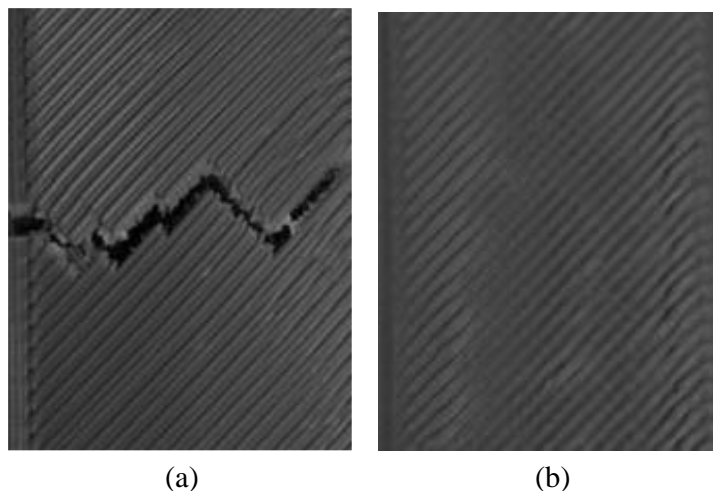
Fracture surface of flexural samples, (a) Top surface, (b) Bottom surface
